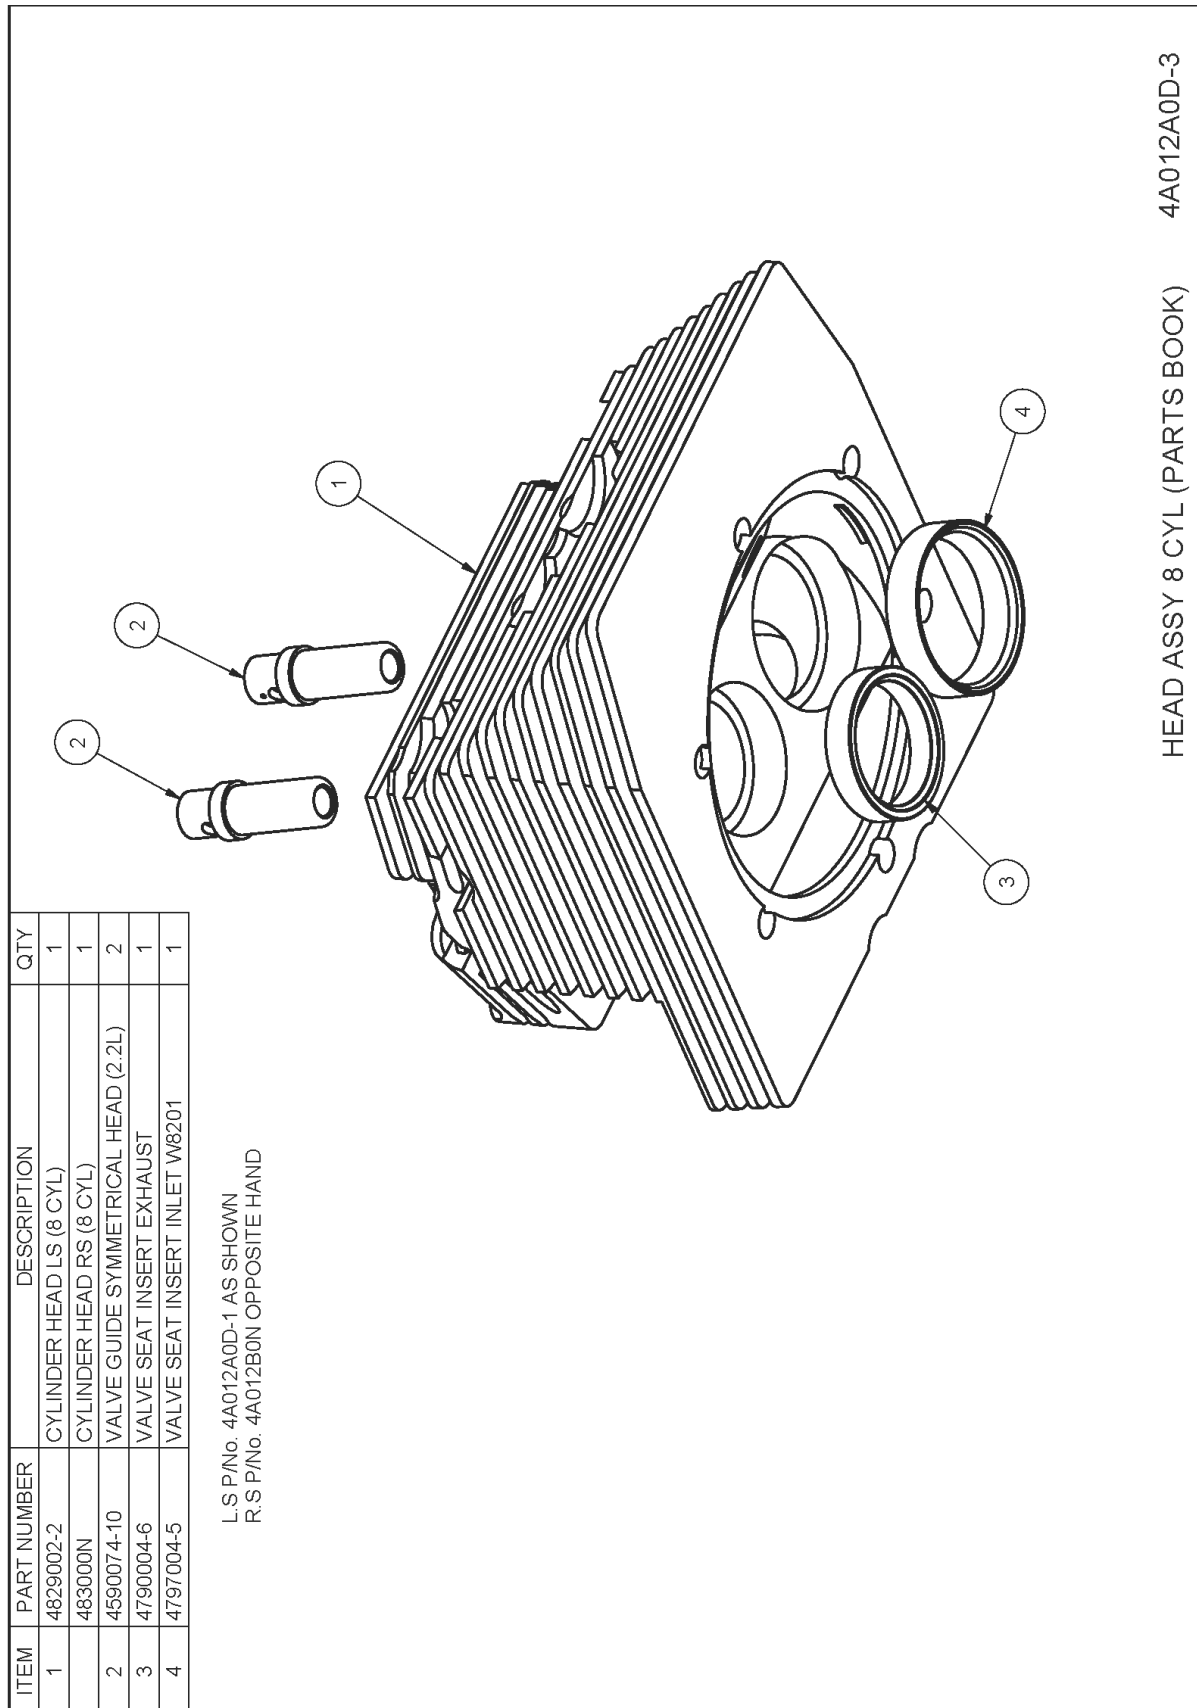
Head, Valve Guides & Seats Assembly to S/N 33
